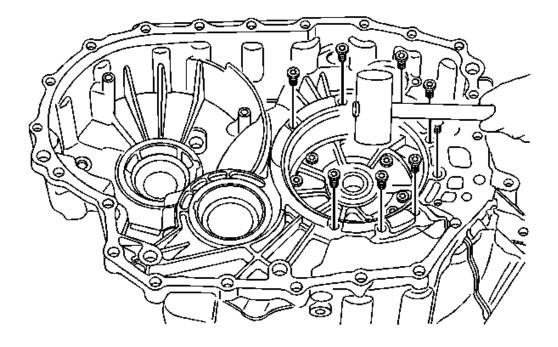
2-6 Clutch Plates Installation Courtesy of GENERAL MOTORS CORP.
